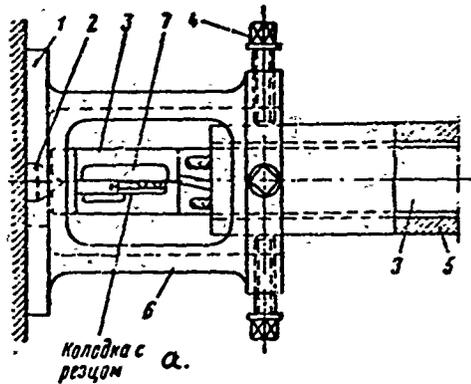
Schematic of stock and attachment installation on the machine for boring the conic bores shown in Fig. 97
